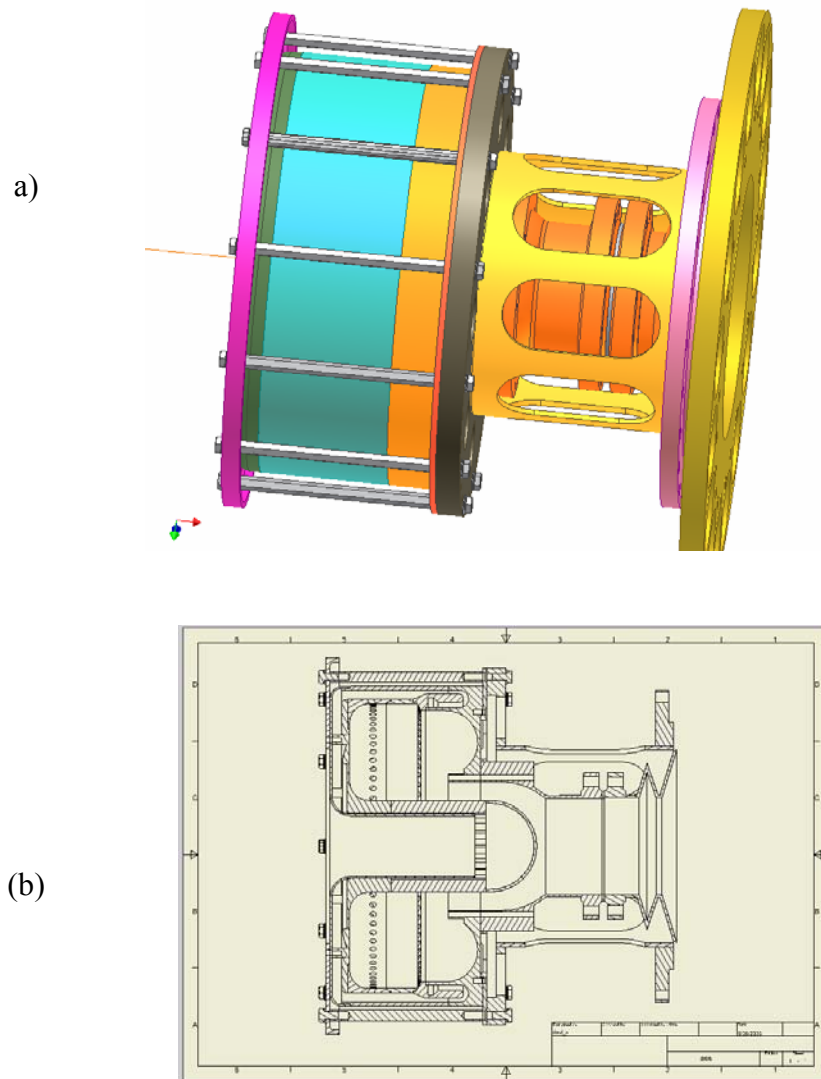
Engineering drawing of the pilot combustor (a) and its 3D view (b)
